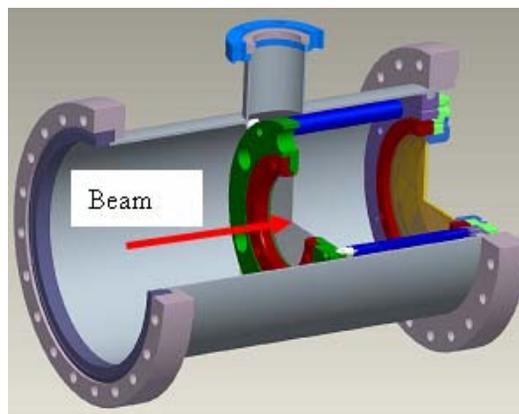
Cut-out view of the pepper pot – scintillator screen assembly.
